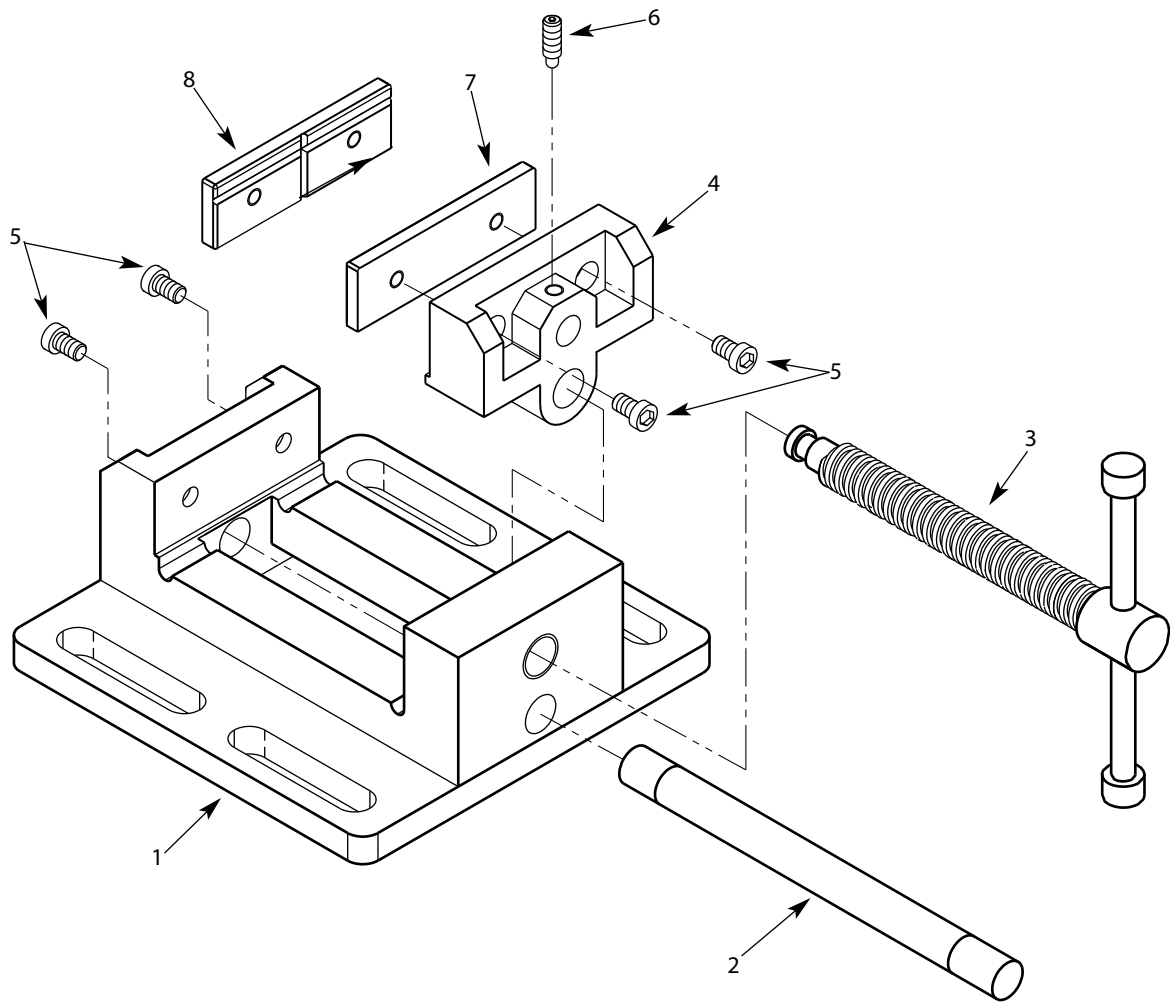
Replacement Parts Illustration for 3", 4", 6" and 8" Low-Profile Drill Press Vises
